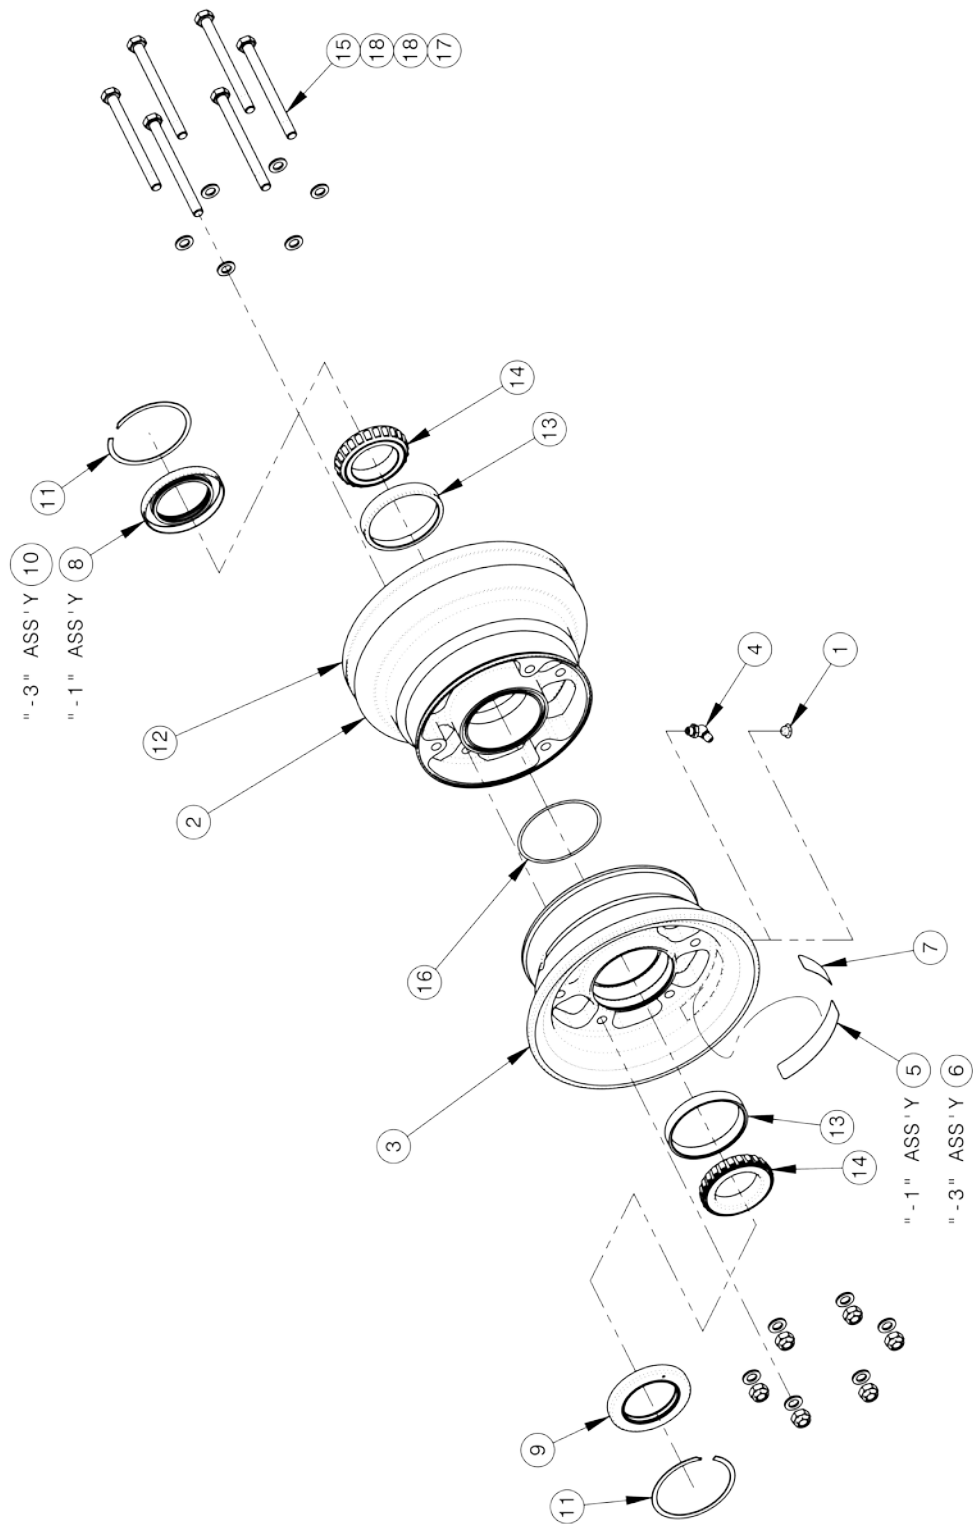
c 35A-51600, 6.00-6 MAIN WHEEL ASSEMBLY, GREASE PACK TYPE
